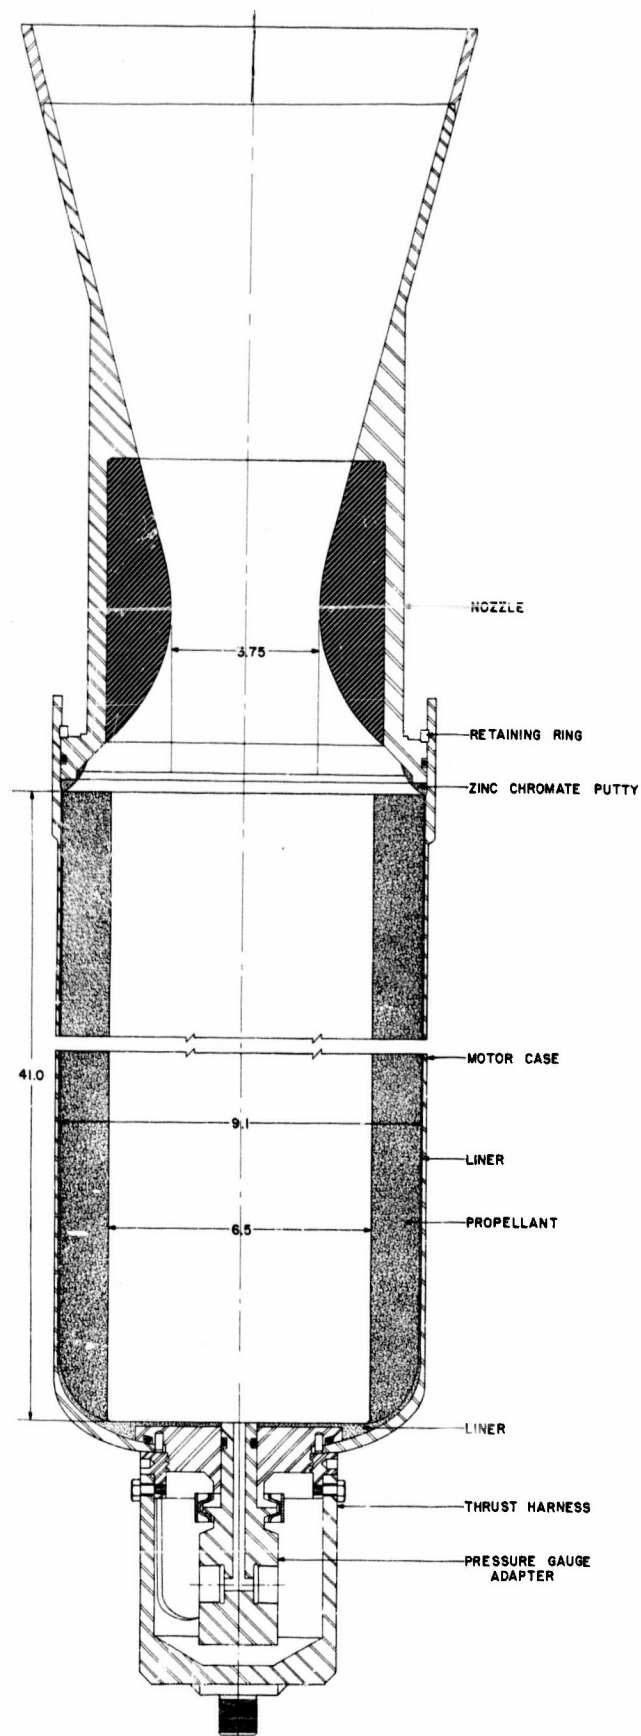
9C6.5-40 STATIC TEST MOTOR (80-lbm MOTOR) FIRING ASSEMBLY.
